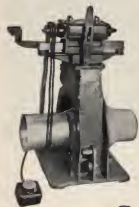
Original Design of wire straightening machine. Required considerable machining, cleaning and finishing prior to painting.
